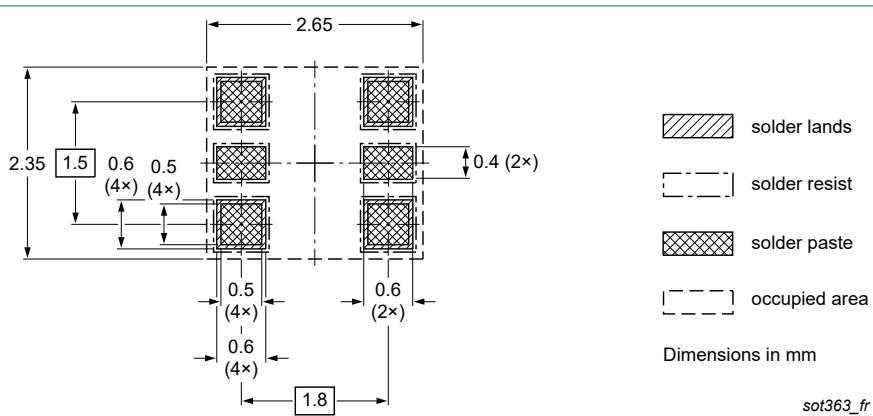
Reflow soldering footprint for TSSOP6 (SOT363)
